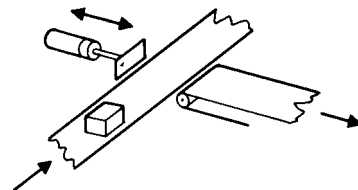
Pusher diverter. When triggered, the pusher advances and moves item onto another conveyor. A movable sweep can also be used.
